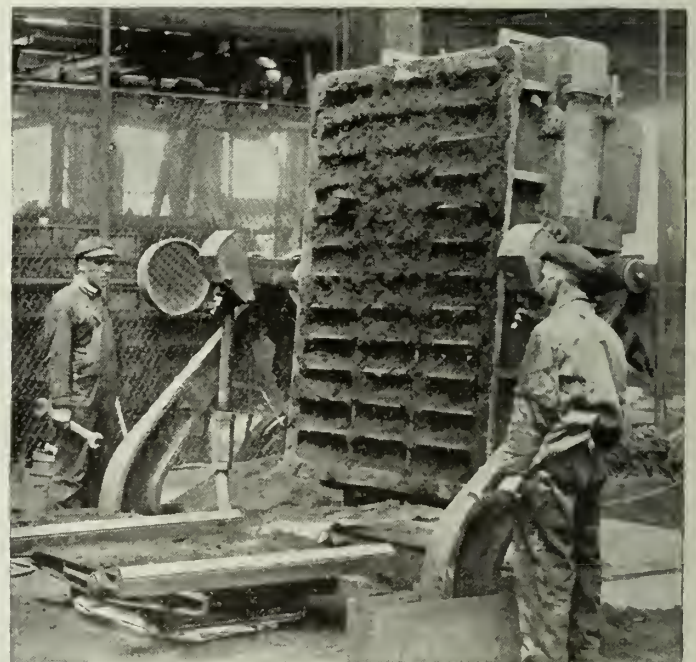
MOLD BEING ROLLED OVER, ENTIRELY AUTOMATIC
